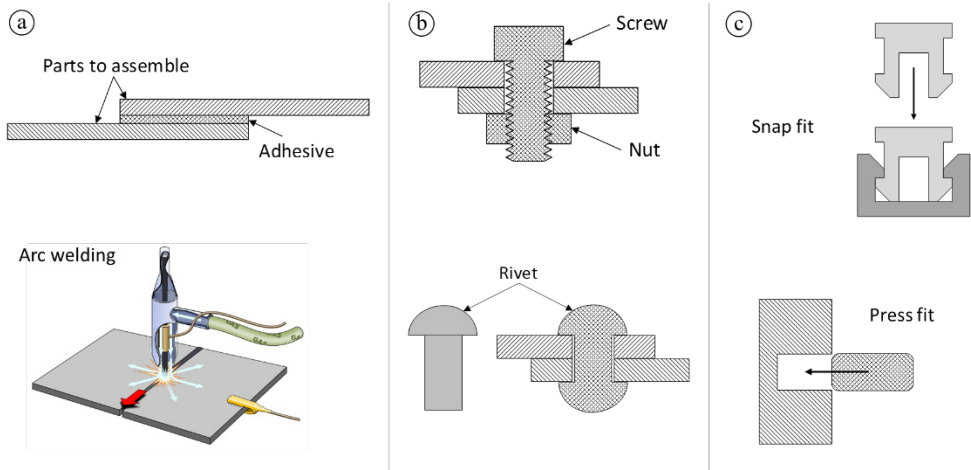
Illustration of different assembly manufacturing processes: a) Joining b) Using fasteners c) Interference fitting.
